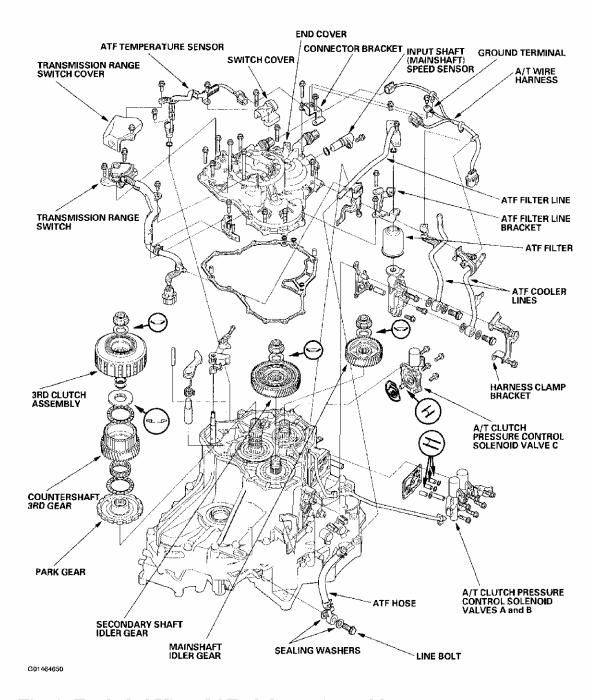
Exploded View Of End Cover Assembly Courtesy of AMERICAN HONDA MOTOR CO., INC.
